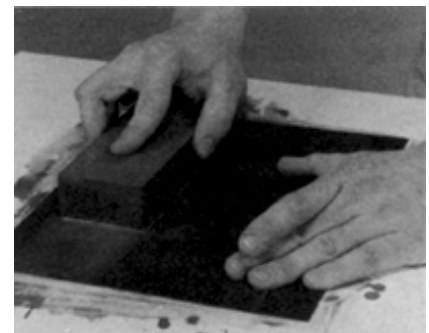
To flatten a water stone, use a generous amount of water and rub the stone over wet/dry silicone carbide sandpaper.
